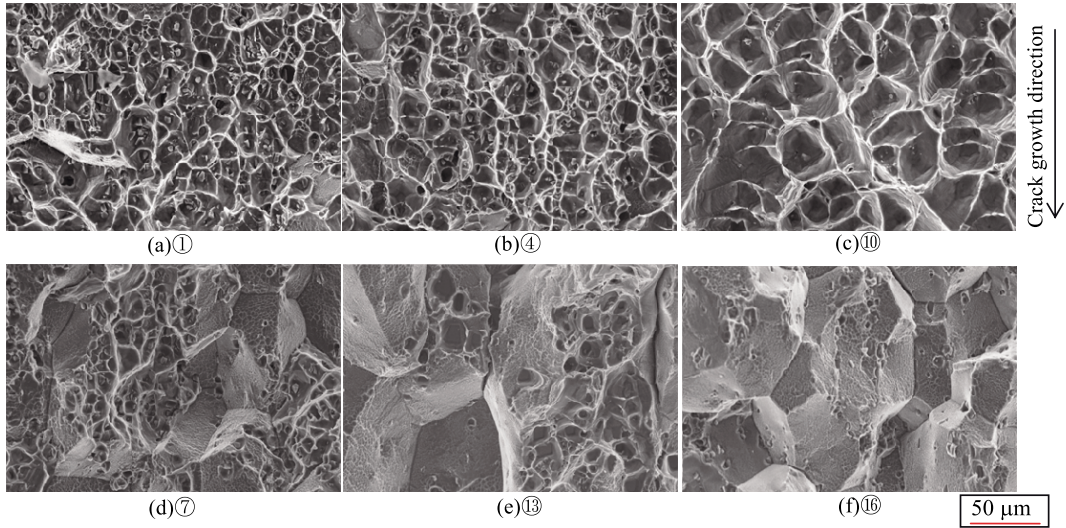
Fracture surfaces of the special alloys without Cu .
